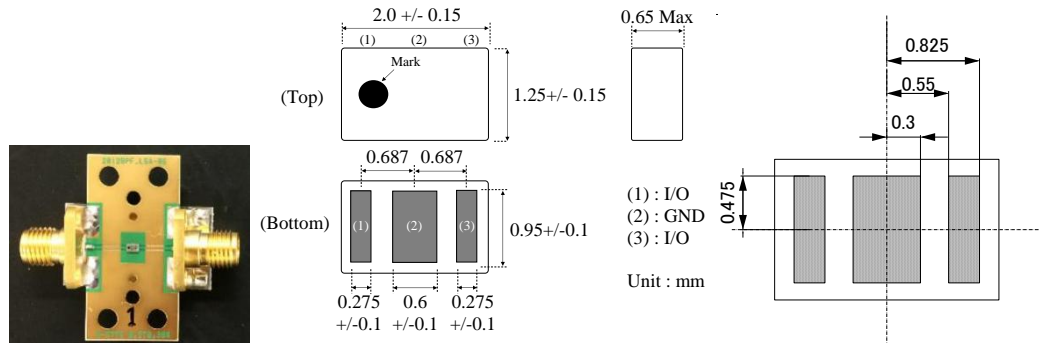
Multilayer Ceramic Filter with its evaluation board (example photo), Dimension and footprint
